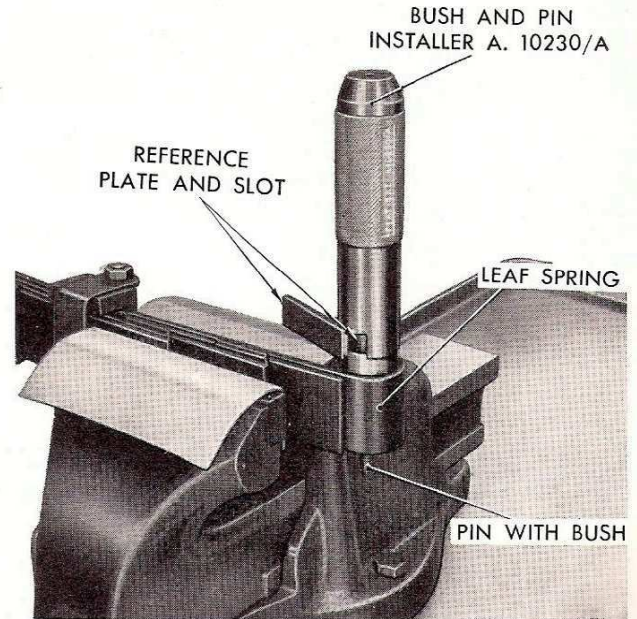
Installing the bushing with pin in spring rear eye, using installer A. 10230 (A. 74020).
